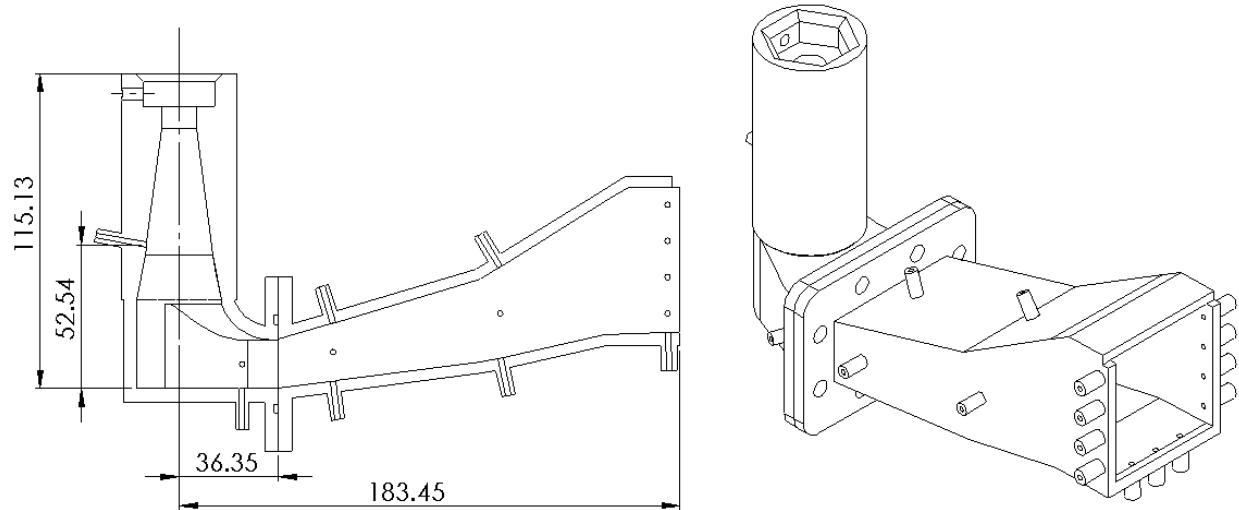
,CAD drawings of model 1 elbow and diffuser section assembled: side view of half of model 1 (left), Isometric view of whole model 1 (right), dimensions in millimetres.
